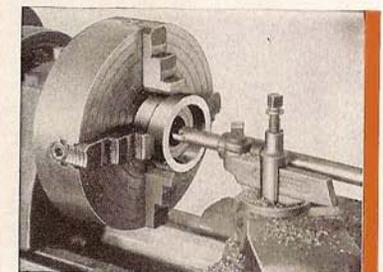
Boring a Steel Collar Held in a 4-Jaw Independent Chuck.
